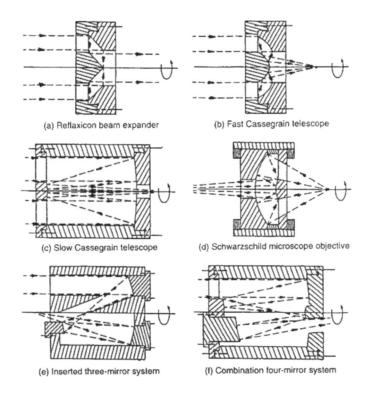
Six types of metallic optomechanical assemblies made by SPDT machining of optical and interfacing surfaces to facilitate assembly with little or no alignment required. (From Gerchman.³⁵)
